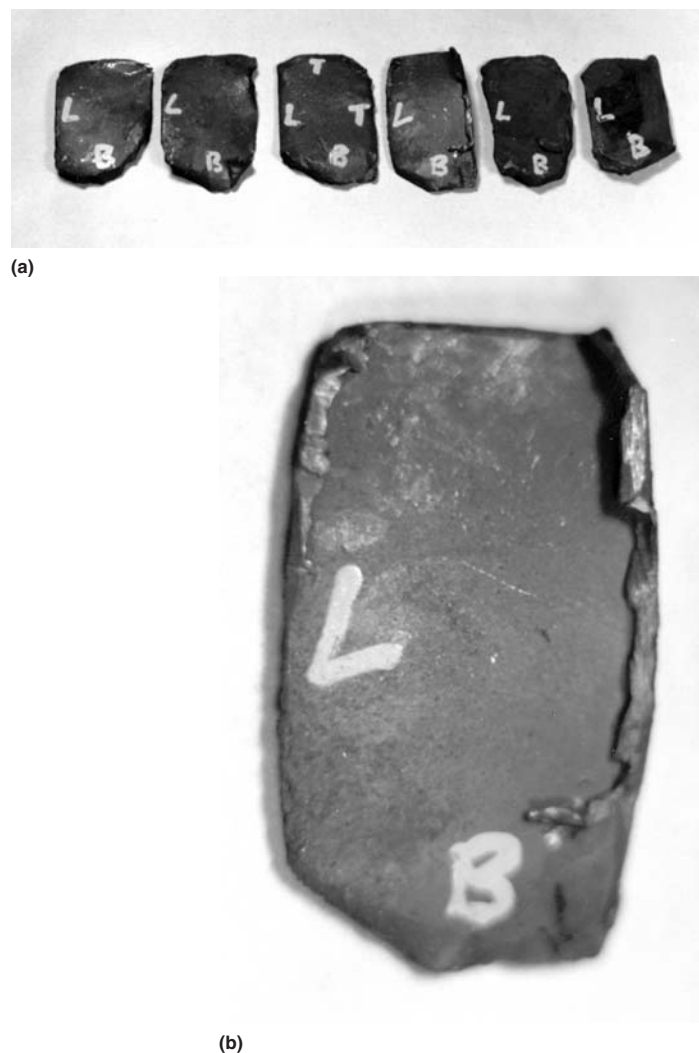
(a) Fractured airfoil sections. (b) Close-up view of one of the sections
